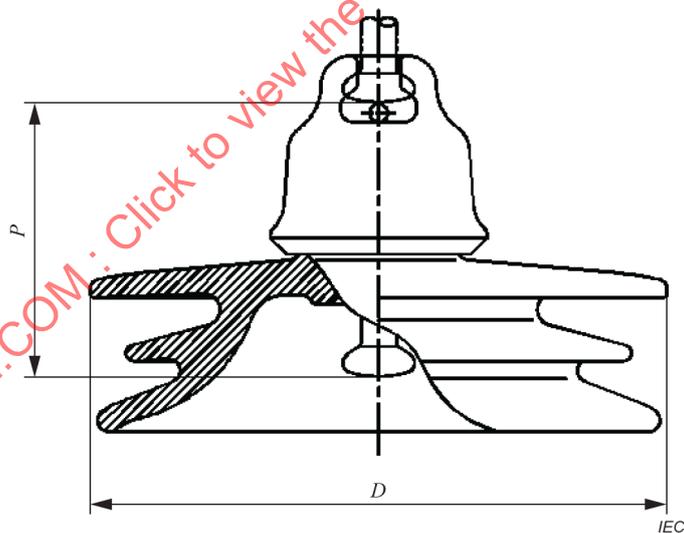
String insulator unit of three-alternating profile with ball and socket coupling
